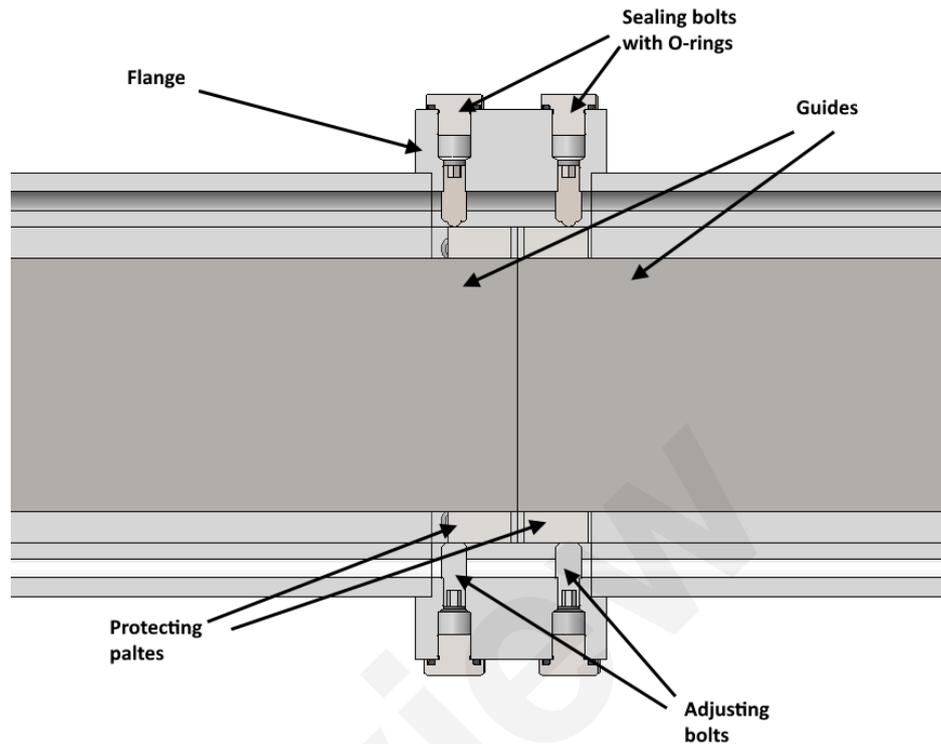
Section view of a beam connecting flange. The sealing bolts covering the adjusting bolts.
